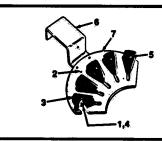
HAND TRACTION ASSEMBLY (BF00-800).
